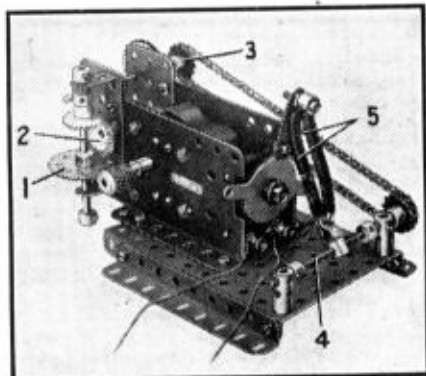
A novel automatic reversing mechanism for an E20R type Electric Motor.
